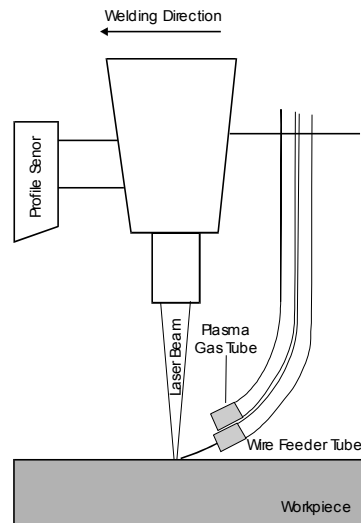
Sketch of equipment set-up at the weld scene.
